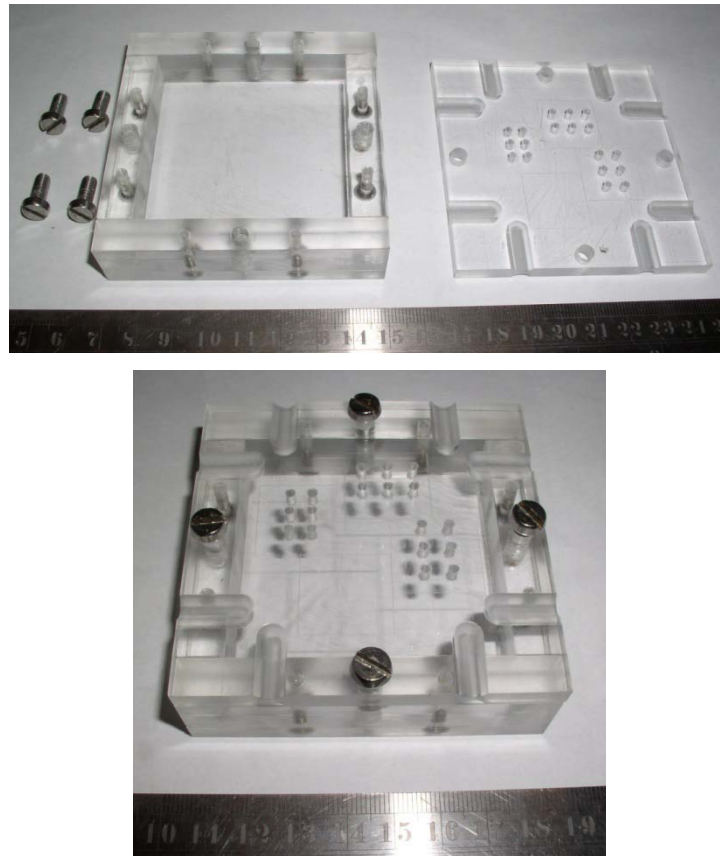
This figure shows the plaque embedding mould. Top plate shows the open mould. The three sets of six holes on the cover (top right) are air release holes that also mark the position of the plot area where the plaque must sit during moulding. The sets of two channels on each edge of the lid allow any air bubbles on the surface to escape when the lid is attached. The lower plate shows the closed mould.
